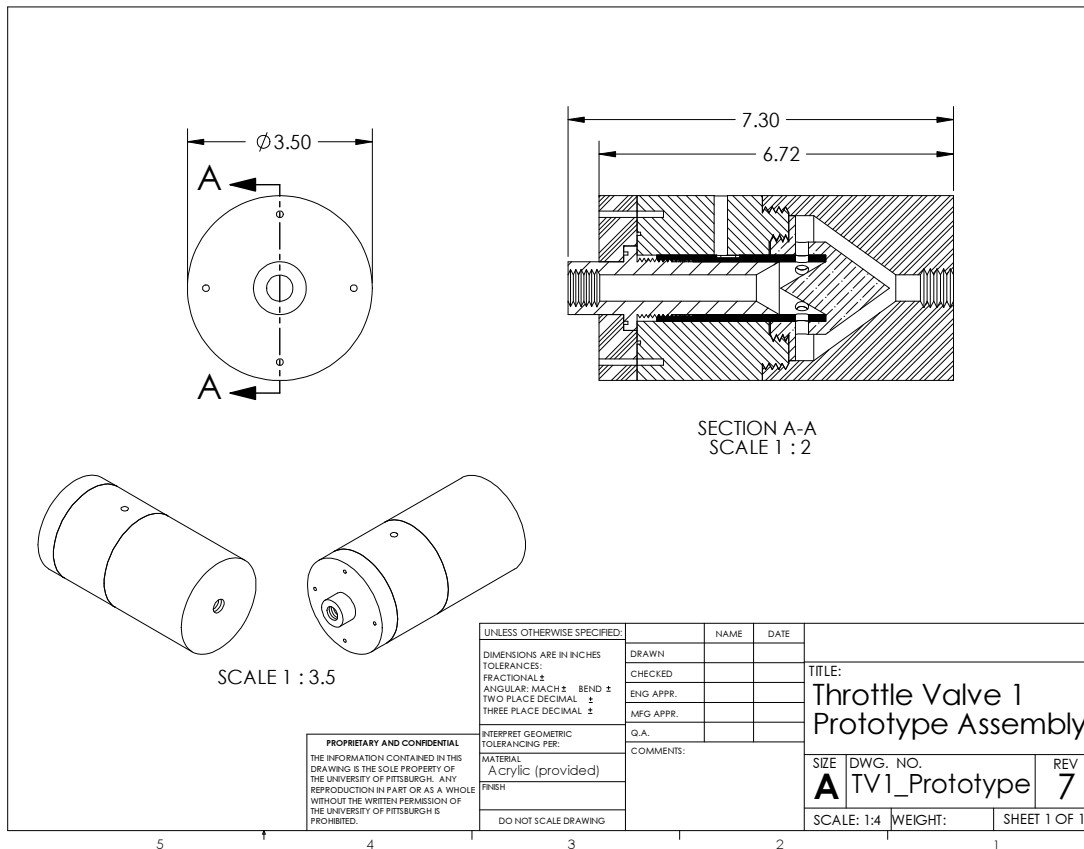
Assembly drawing for barrel valve prototype (TV1).
